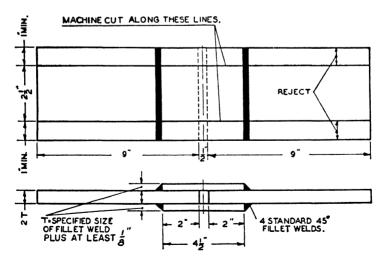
Transverse Fillet Weld Shearing Specimen after welding. Instructions for preparation (machining) the samples are indicated
